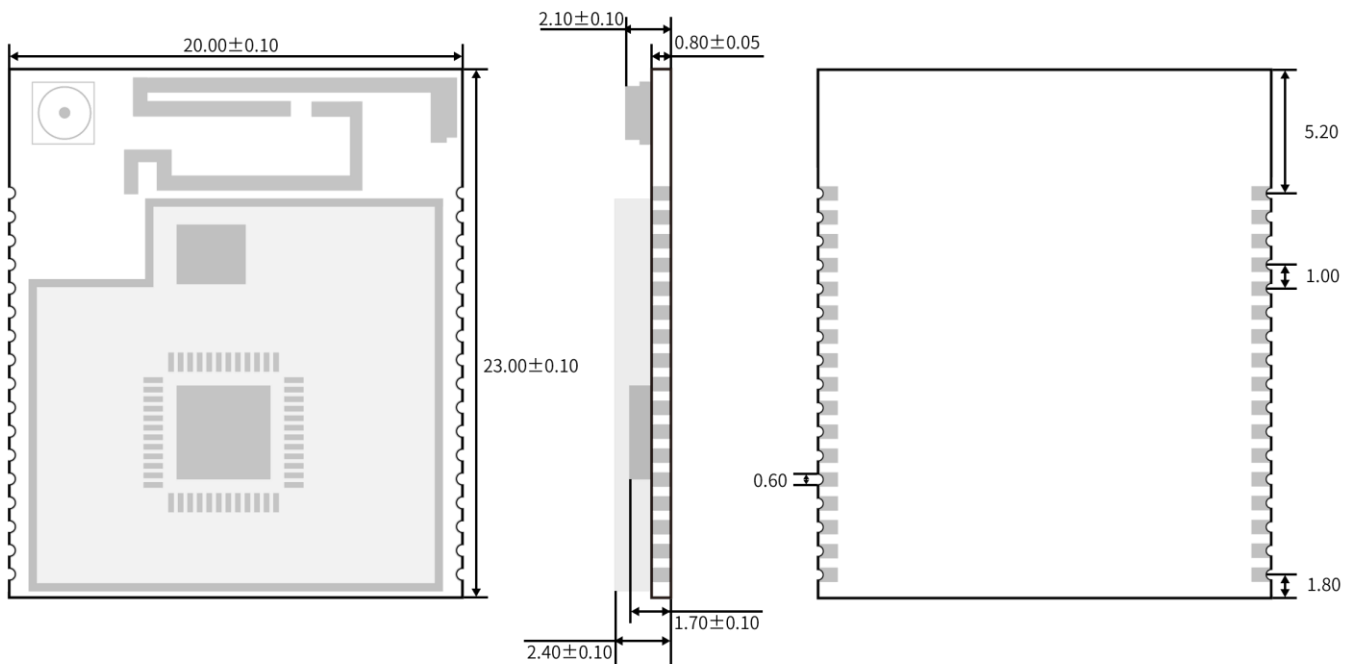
Recommended PCB Footprint of RF-WM-20CMB1 (mm)
